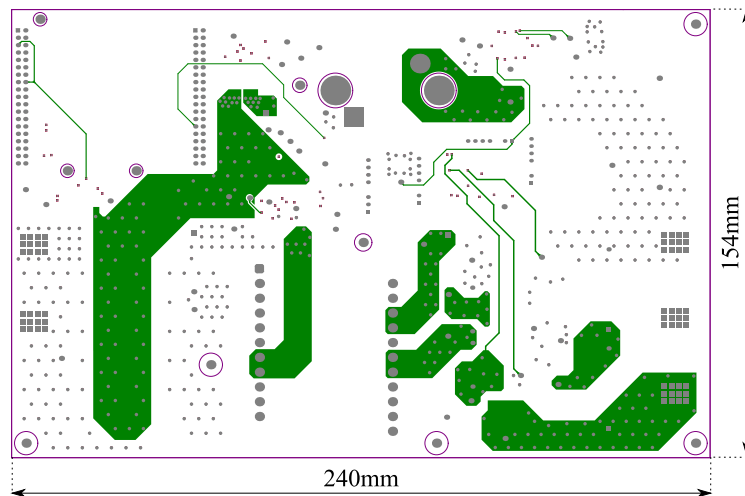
Layout of the first inner layer of the PCB prototype.
